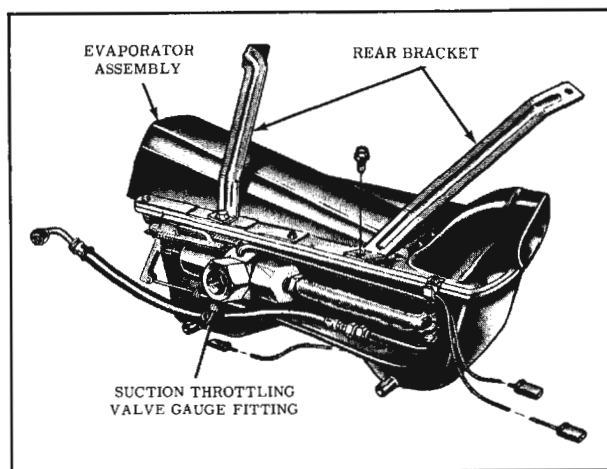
Suction Throttling Valve Gauge Fitting
